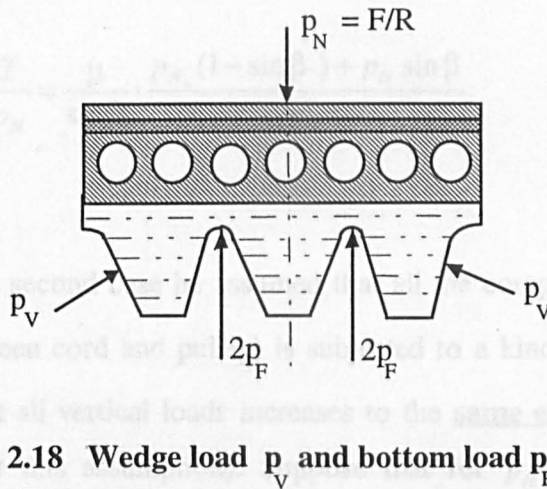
Wedge load p_V and bottom load p_F of the rib
